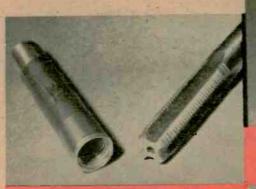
inside of nipple has been threaded with 1/2-24 tap. Base of CB whip, which has 3/4-24 thread, is screwed in nipple.
